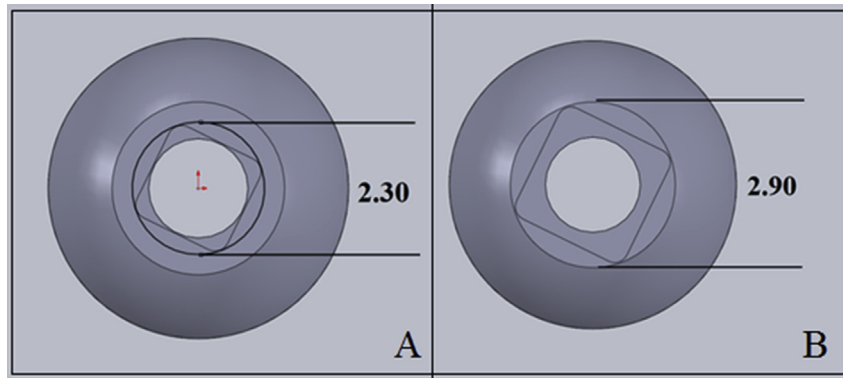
(A) 2.30 mm drive width and (B) 2.90 mm drive width for parametric analysis.
